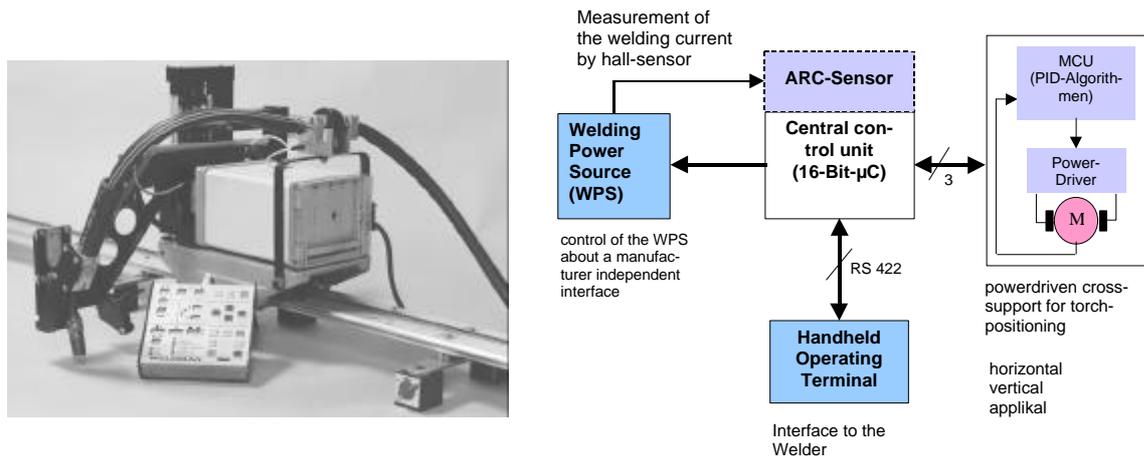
View of the developed automatic welding machine and the basic hardware-concept.
